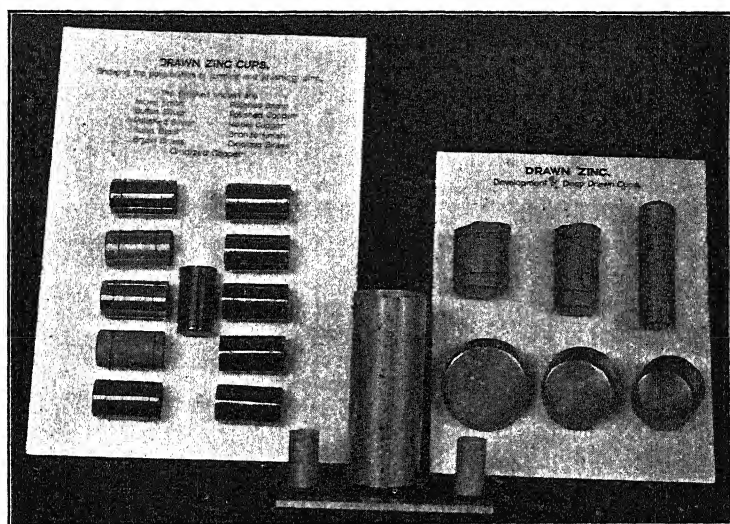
DRAWN AND SOLDERED BATTERY CANS.
